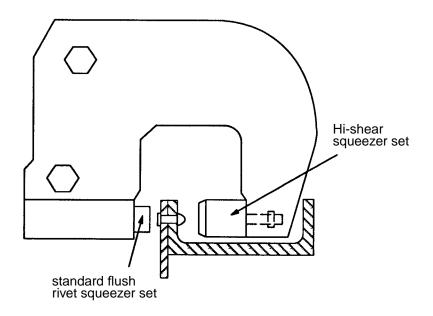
Squeeze Riveting Method for Hi-Shear Rivets
